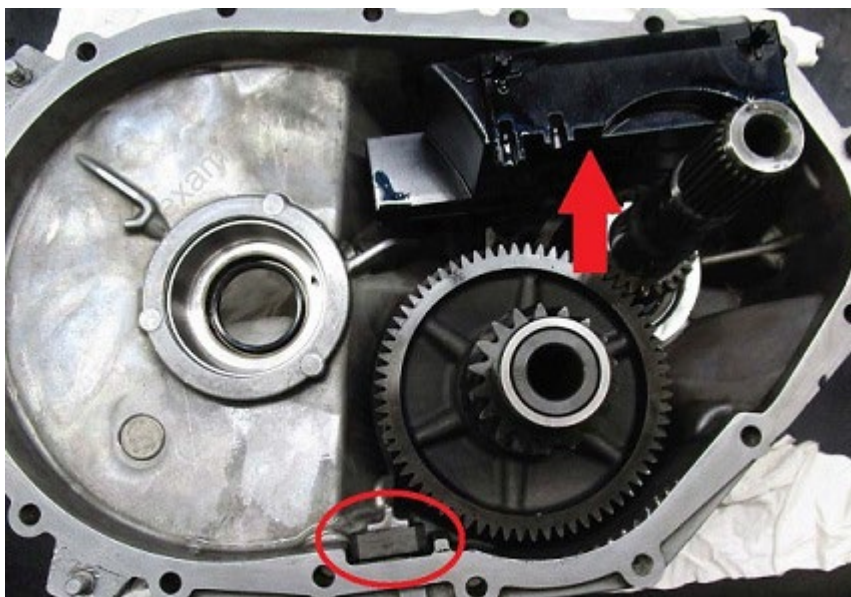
Separating sections of gearbox housing from each other using assembly lever.
